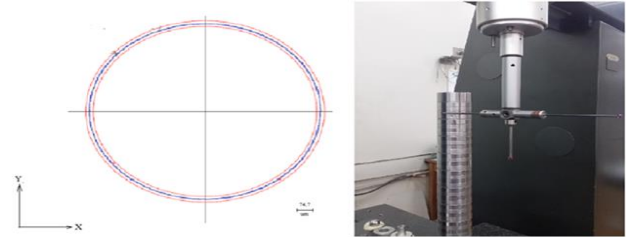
Out of roundness measurements of the workpiece using CMM machine.
